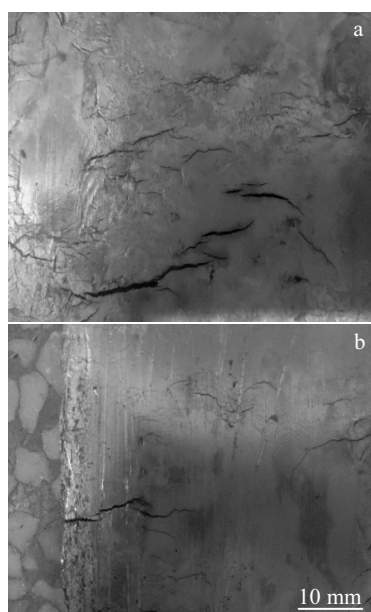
Macro morphologies of cracks at the edge (a) and core (b) in 7050 aluminum alloy cast-rolled plate
